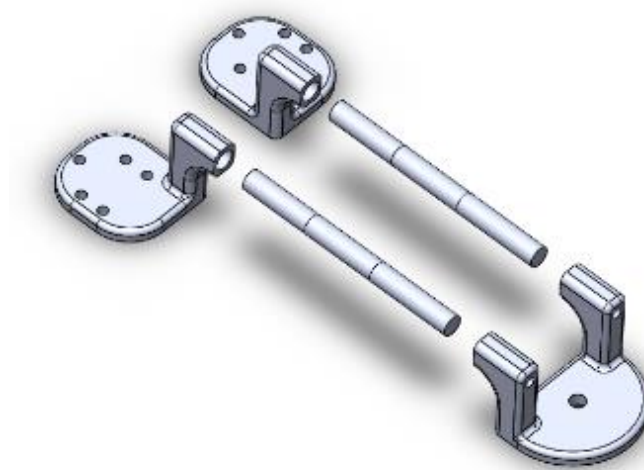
Interrupted Design Saddle Post Connector exploded view
